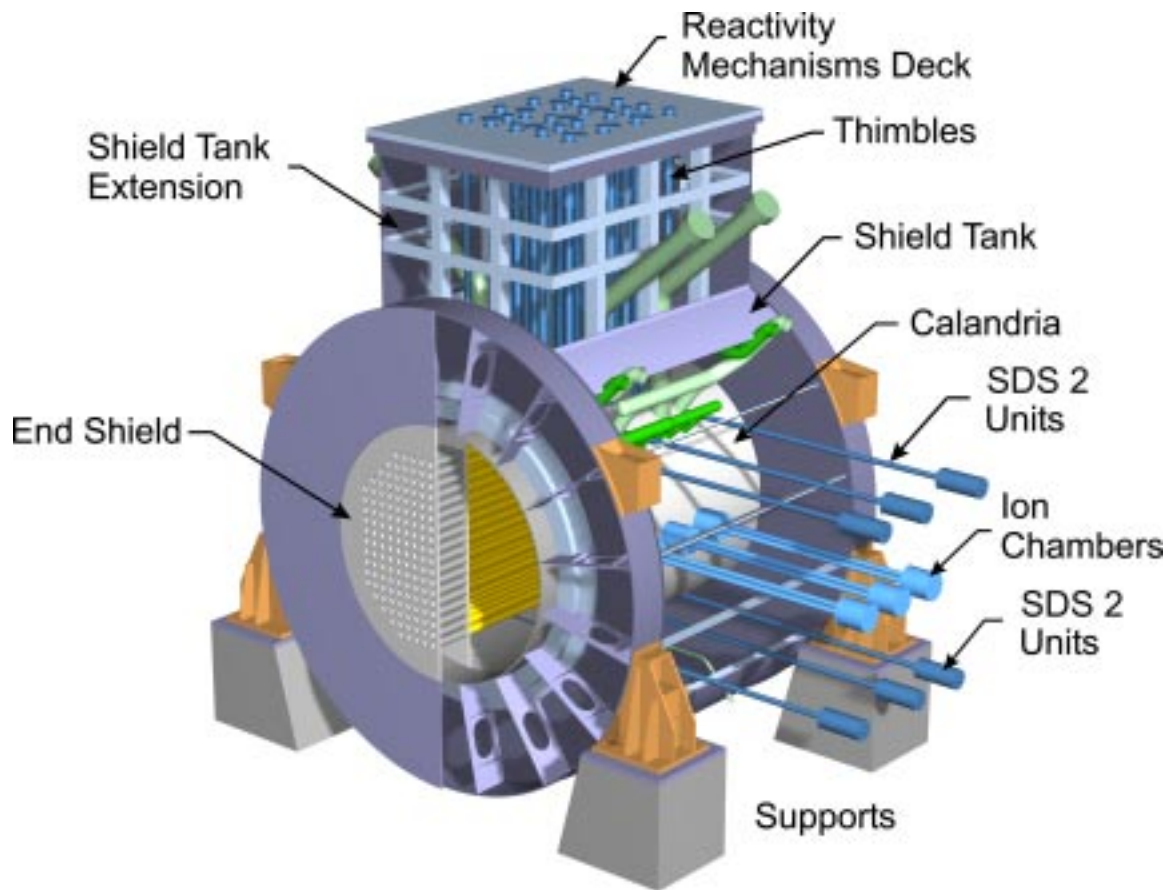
The ACR Calandria and Shield Tank Assembly
